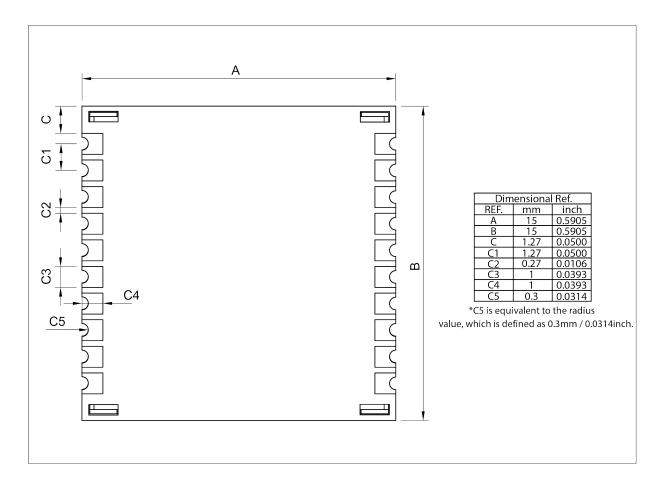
SM5212-uSMD Bottom View (uSMD20 Package)
